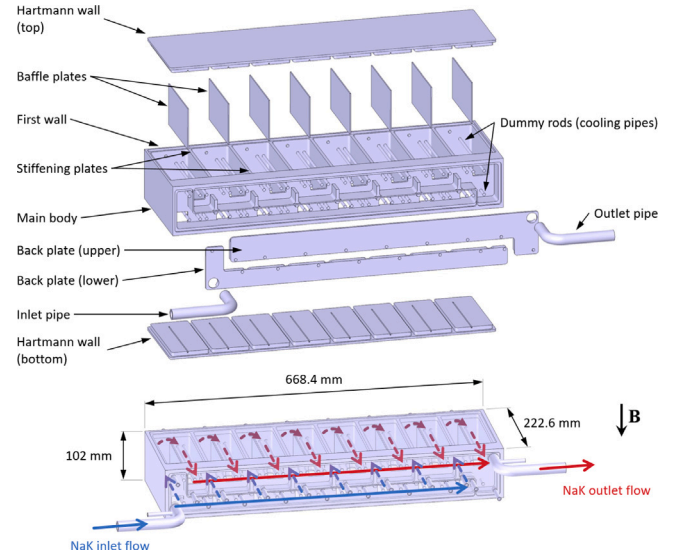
Exploded view of the WCLL TBM mock-up (top) and internal view showing the liquid metal flow paths inside the WCLL TBM mock-up (bottom).
